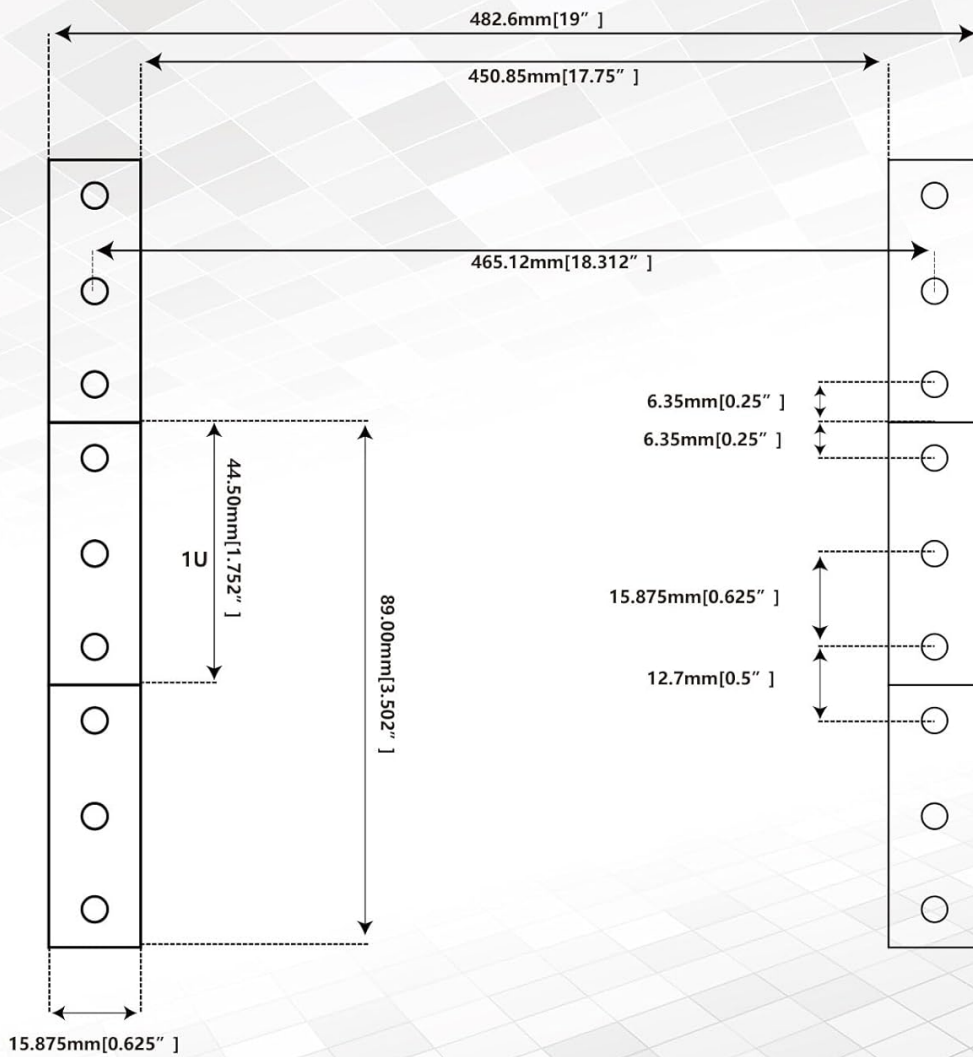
Standard 19-inch Rack Cabinet Dimensions
